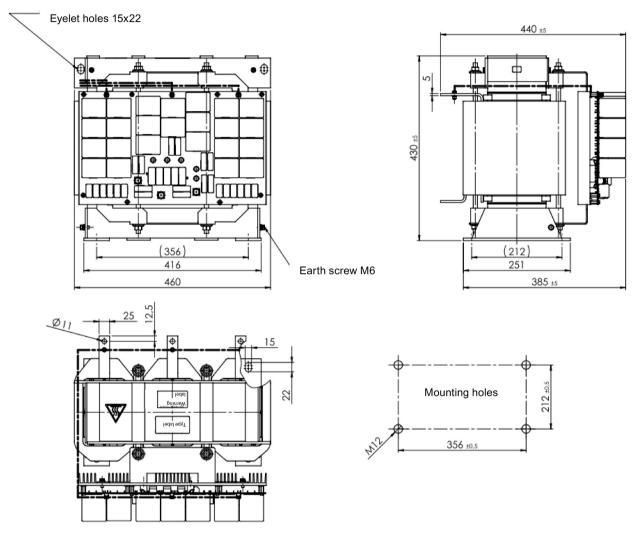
Dimensions for JTA:TEF1203-0MB
